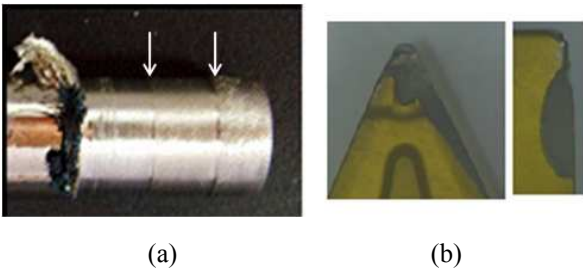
(a) Appearances of $Zr_{50}Cu_{40}Al_{10}$ BMG specimen machined using a TiN CVD coated WC tool, (b) Appearance of TiN CVD coated WC tools after machining BMG specimens
